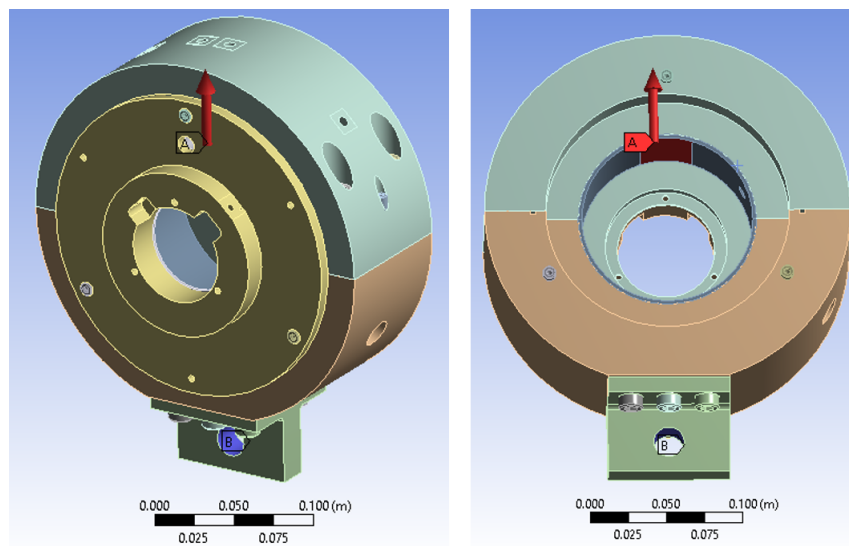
3D geometry of bearing assembly for finite element analysis.
